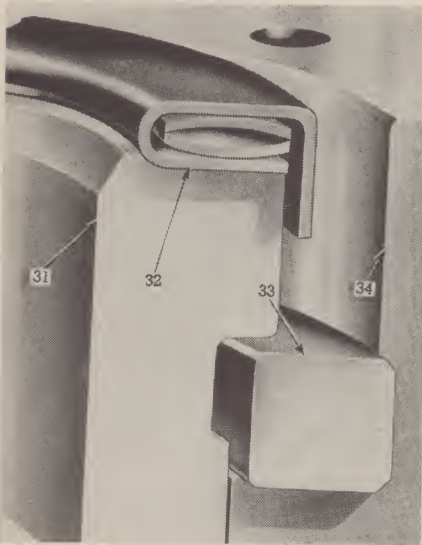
A—A GM engine cylinder liner installation. Insert (33) controls relationship of top surface of liner flange to machined surface of cylinder block.
